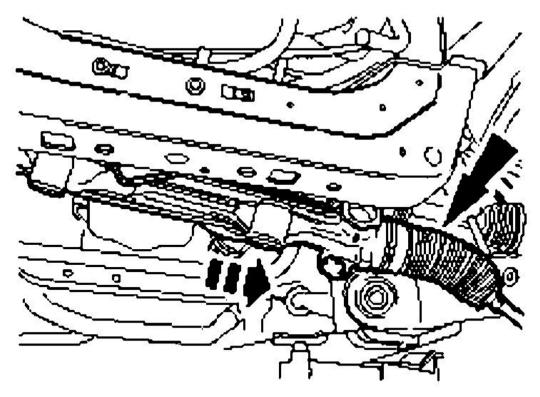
Removing Steering Gear Courtesy of FORD MOTOR CO.
